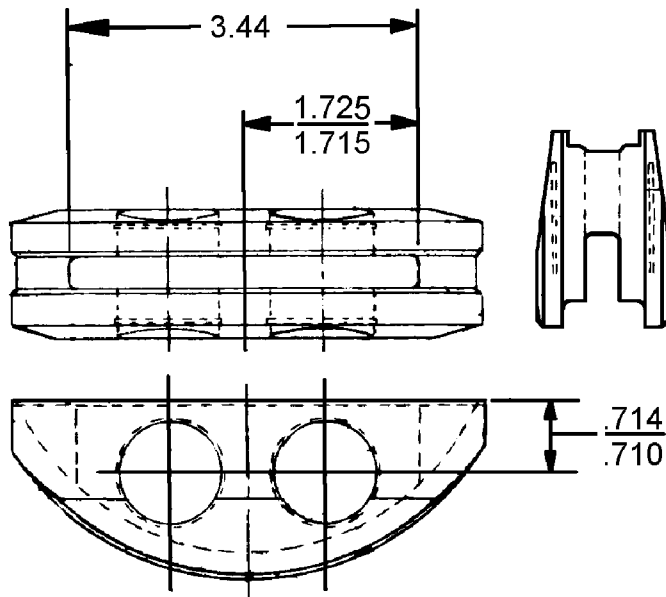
H. 627821 COUNTERWEIGHT ASSEMBLY MADE WITH 626688 COUNTERWEIGHT AND 626564 BUSHINGS
